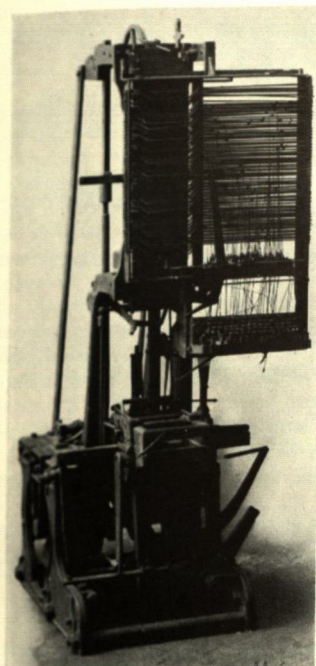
Mergenthaler's second "band" machine of 1884, on which the first line-of-type was cast, and in which a casting apparatus was first used, reproduced from a photograph of an incomplete and damaged machine, the last survivor. See description under Fig. 4.
